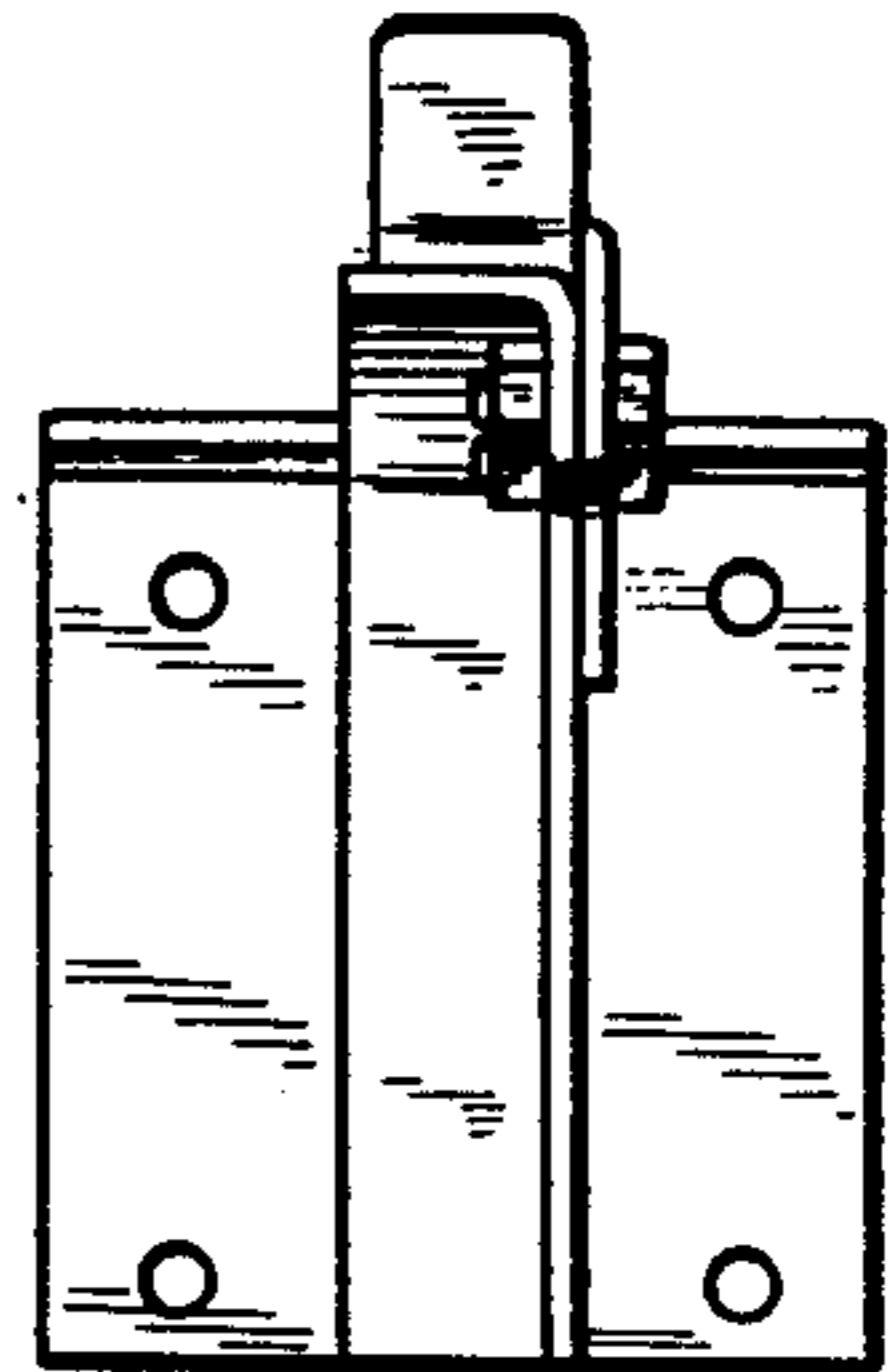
is a reduced perspective view of a hose hanger showing my new design;
